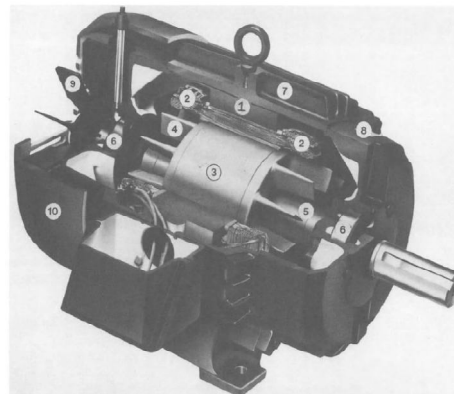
Cross-sectional view of Electric Energy Efficient Motor : 1-Stator laminated steel; 2-stator windings; 3-rotor; 4-rotor fan blades; 5-shaft; 6-bearings; 7-frame; 8-brackets; 9- external fan; 10-fan cover. (Source: Reliance Electric Company.)
